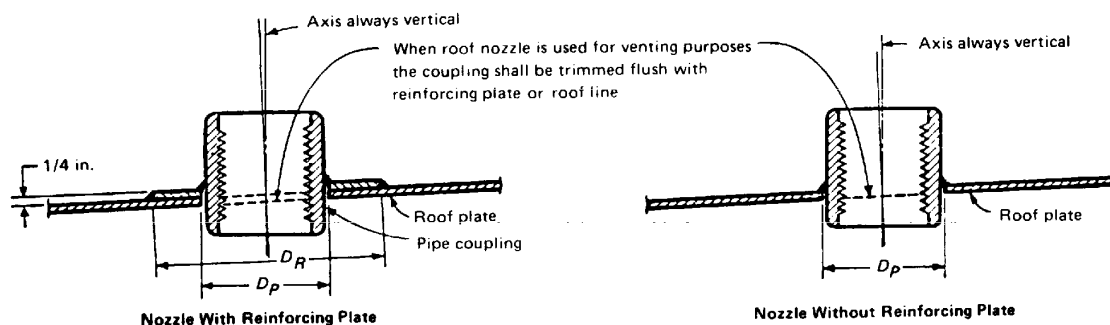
(a)-2 SCREWED OR SOCKET WELD ROOF NOZZLES
